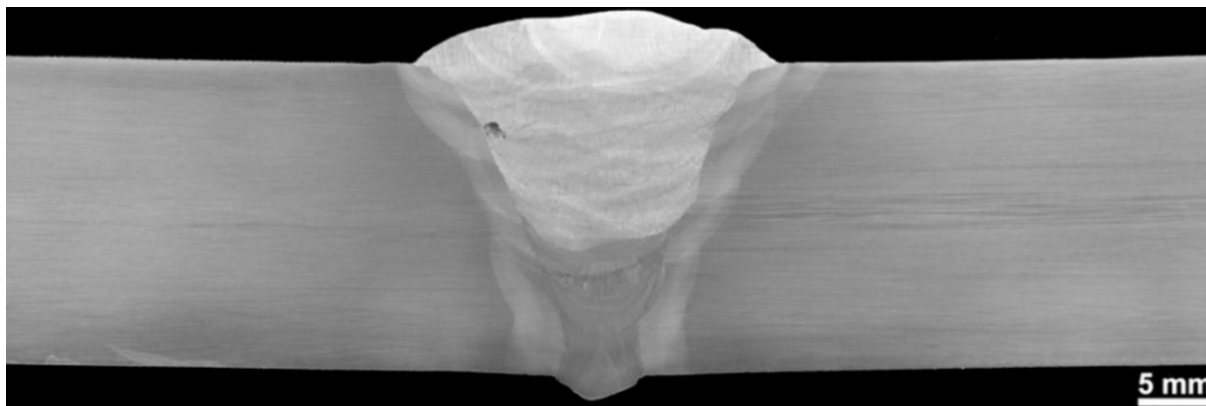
Macrograph of the structures present in the girth weld of the X80 steel pipe.
